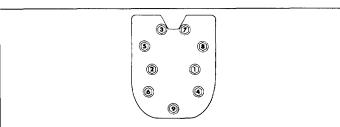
Cleaning Cylinder Heads / Combustion Chambers And Tightening Sequence
